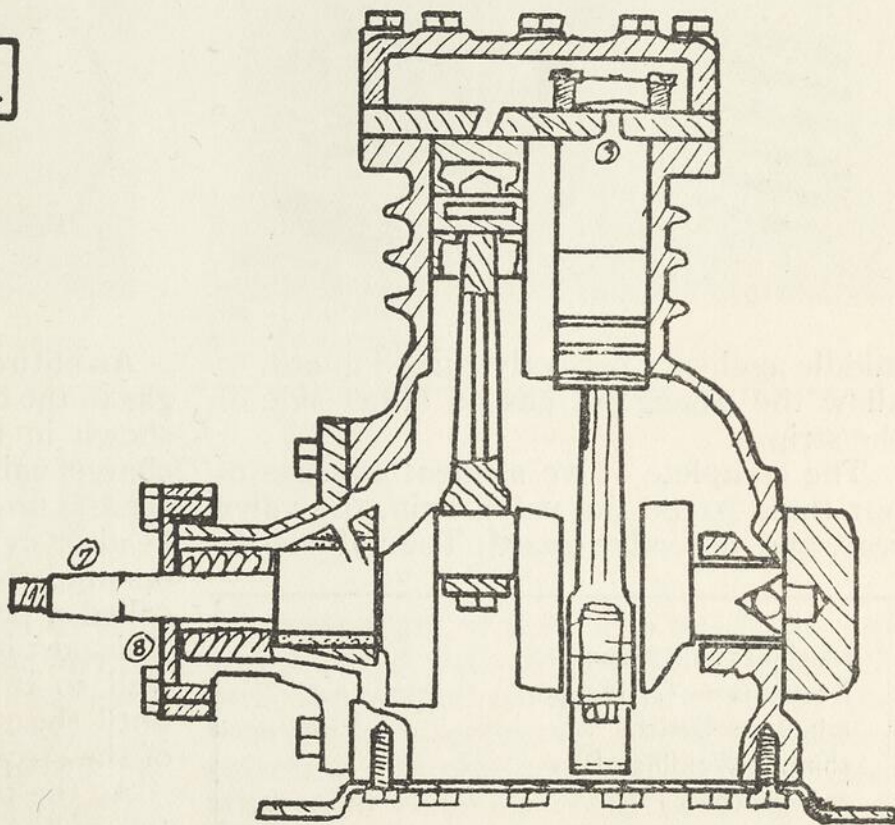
Side View Showing Valves and Crankshaft in Compressor (Leonard).
